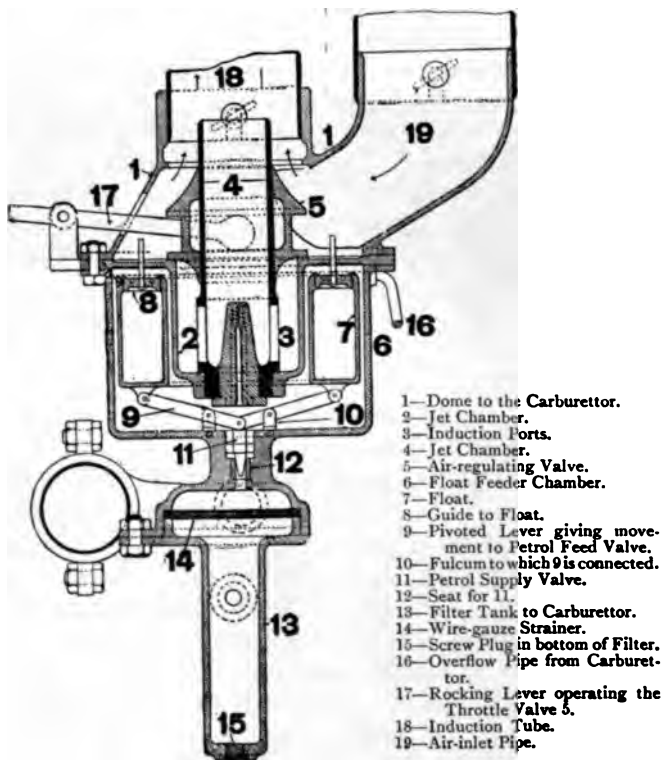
SECTIONAL ELEVATION OF THE HUTTON CARBURETTOR
